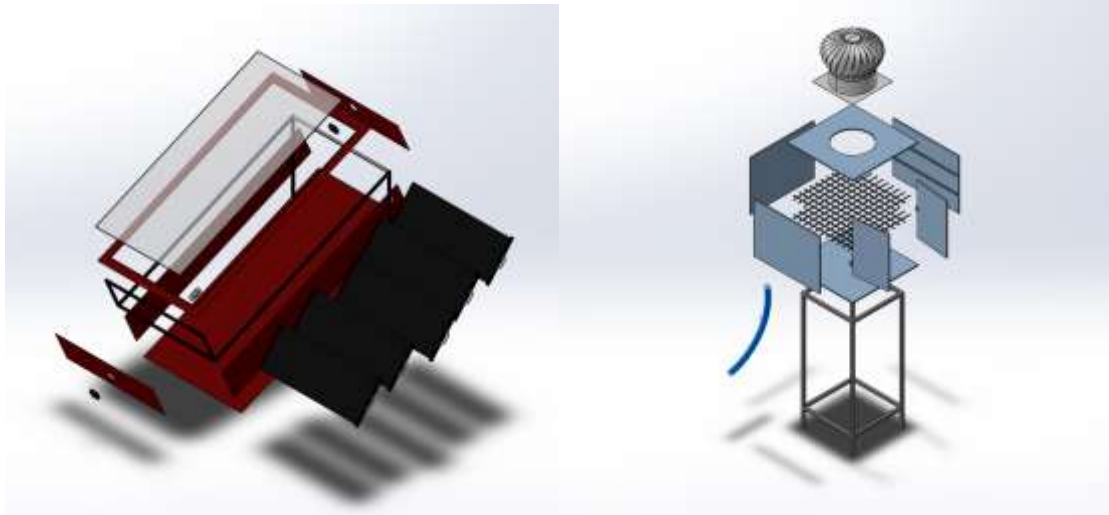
Exploded view of indirect type solar dryer and direct type solar dryer
